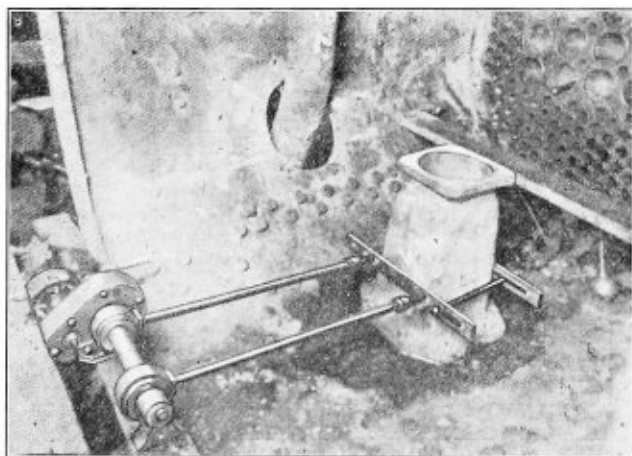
Mechanical device for grinding in exhaust nozzle seats
